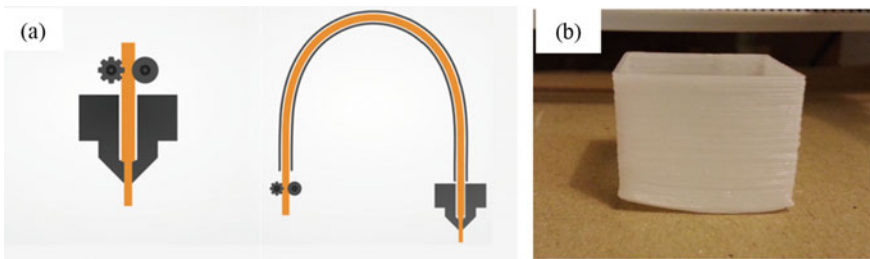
a Schematic of Direct and Bowden Extruder [29], and b Warped 3D printed part [30]
